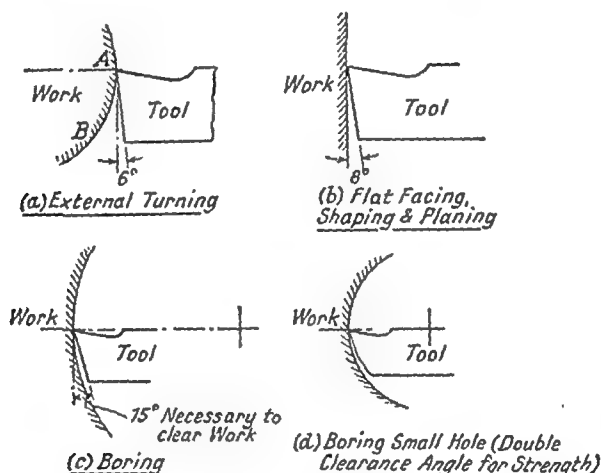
Effect of Cutting Conditions on Tool Clearance.
